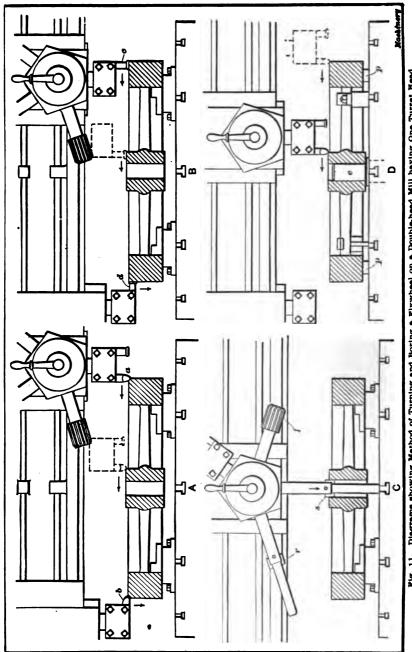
Diagrams showing Method of Turning and Boring a Flywheel on a Double-head Mill having One Turret Head
